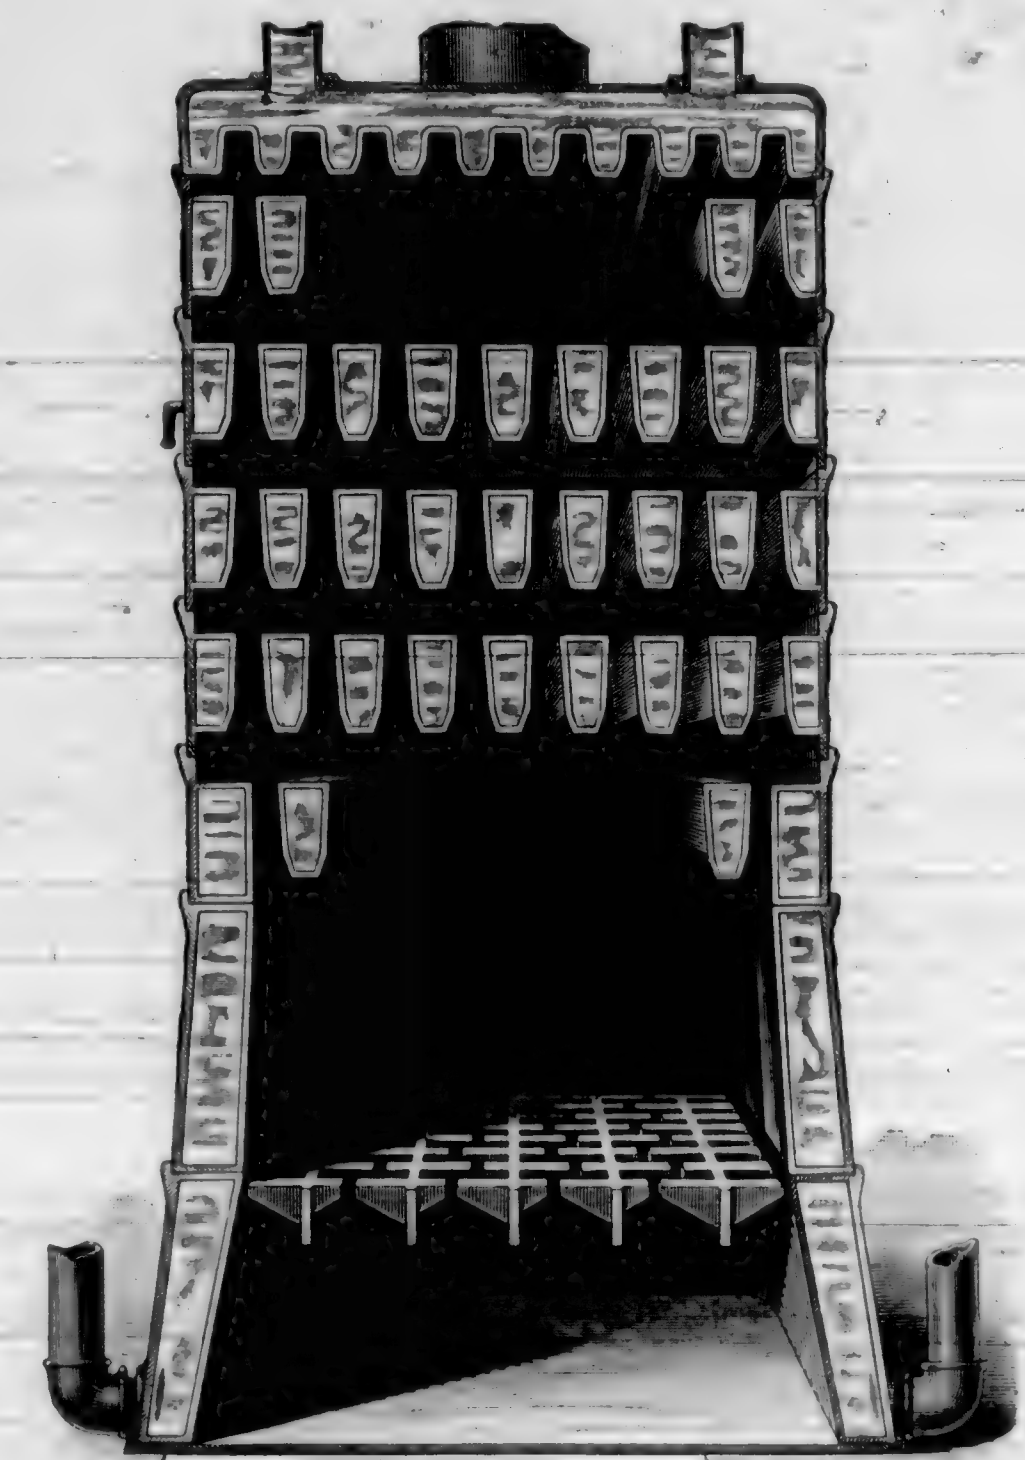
SECTIONAL VIEW SHOWING WATER SPACES.
